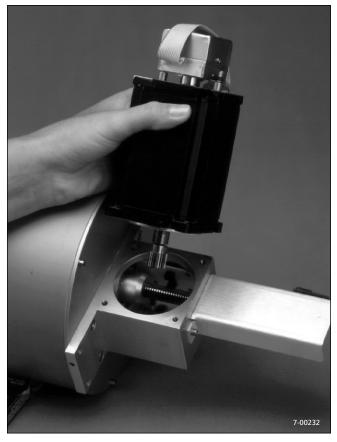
Gear mesh procedure: Positioning motor encoder
